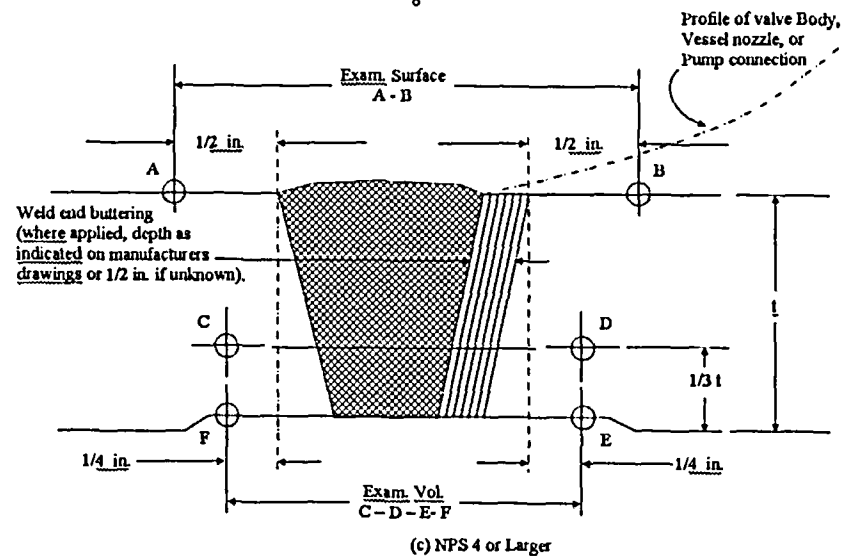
SIMILAR AND DISSIMILAR METAL WELDS IN COMPONENTS, NOZZLES, AND PIPING
